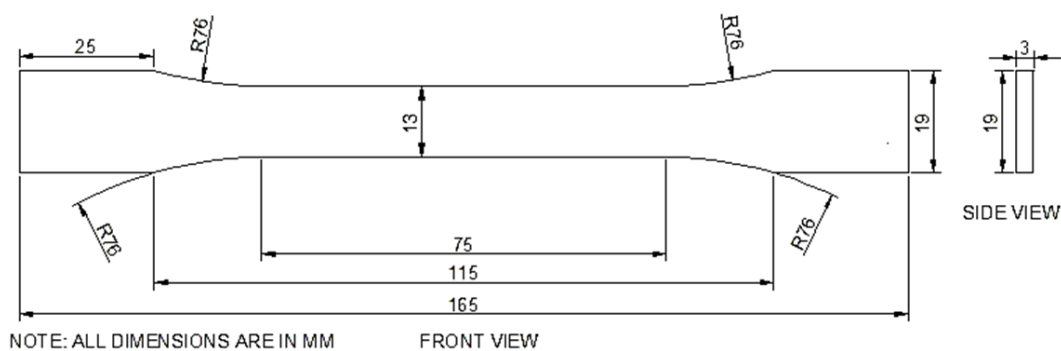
Specimen geometry for tensile test according to ASTM D-638
